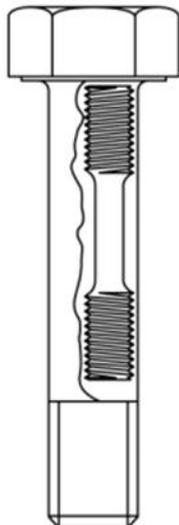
Location of Standard Round 2-in. Gage Length Tension Test Specimen When Turned from Large Size Bolt
